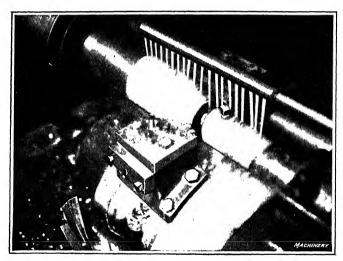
Pipe with Series of Holes to distribute Coolant to Tools on Shell Turning Lathe
